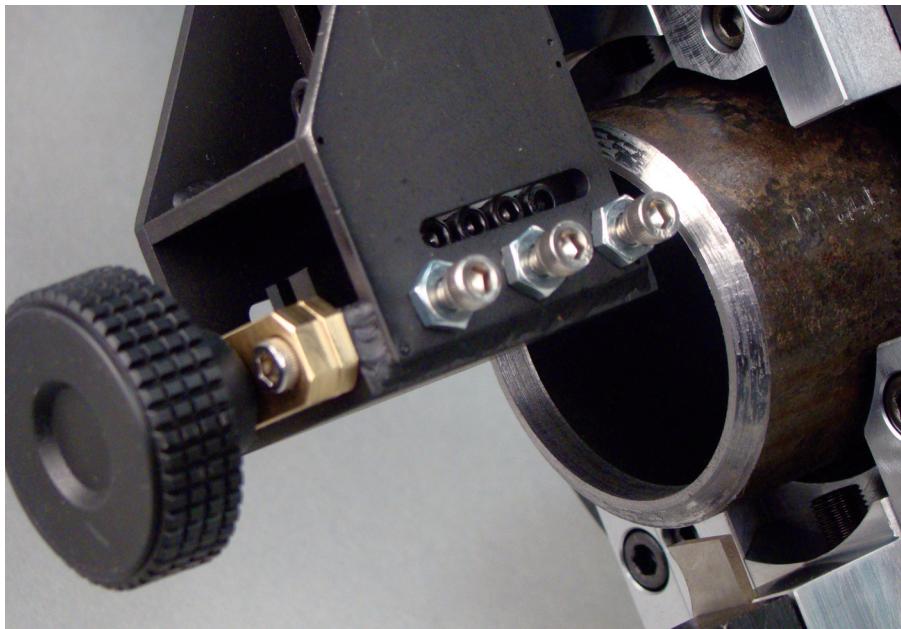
Accessories are available as part of a complete machining system. Shown here is a counterbore module machining the inside surface of the weld prep area.
